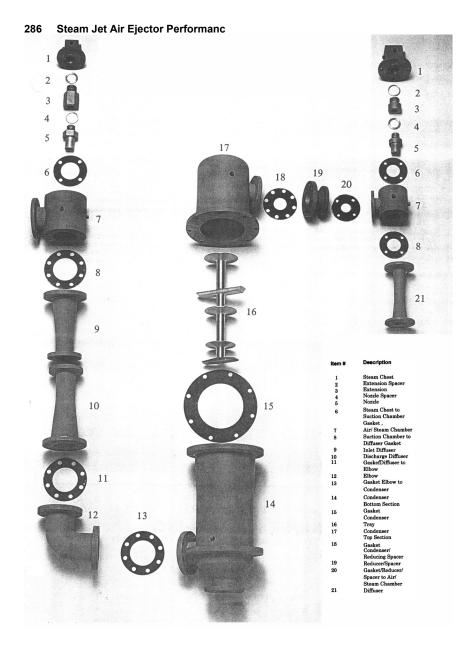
Two-stage ejector with contact intercondenser, disassembled. (Courtesy Unique Systems, Inc.)
